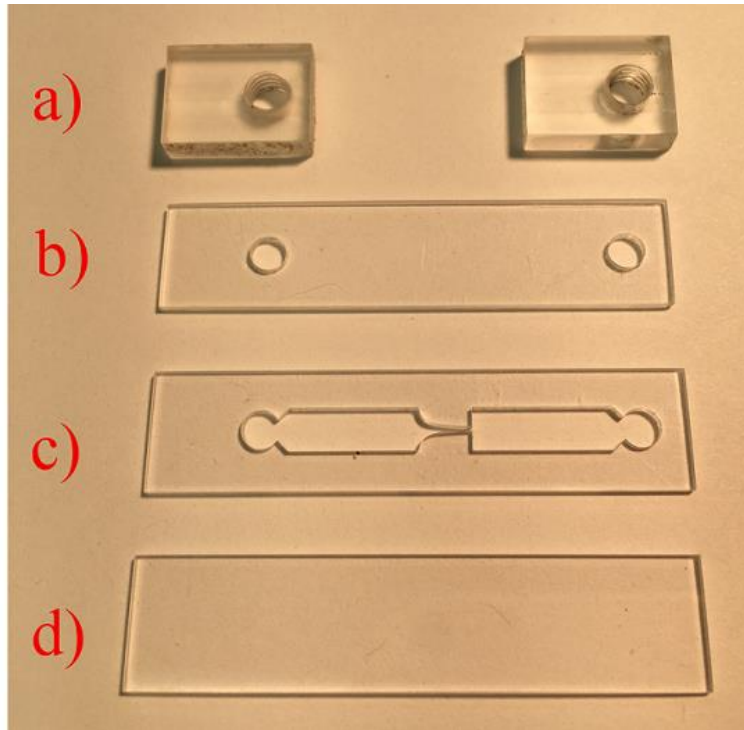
Parts of a typical microchannel, a) inlet and outlet blocks, b) top sheet with inlet and outlet holes, c) the middle sheet with microchannel geometry, and d) the bottom sheet to close the channel
